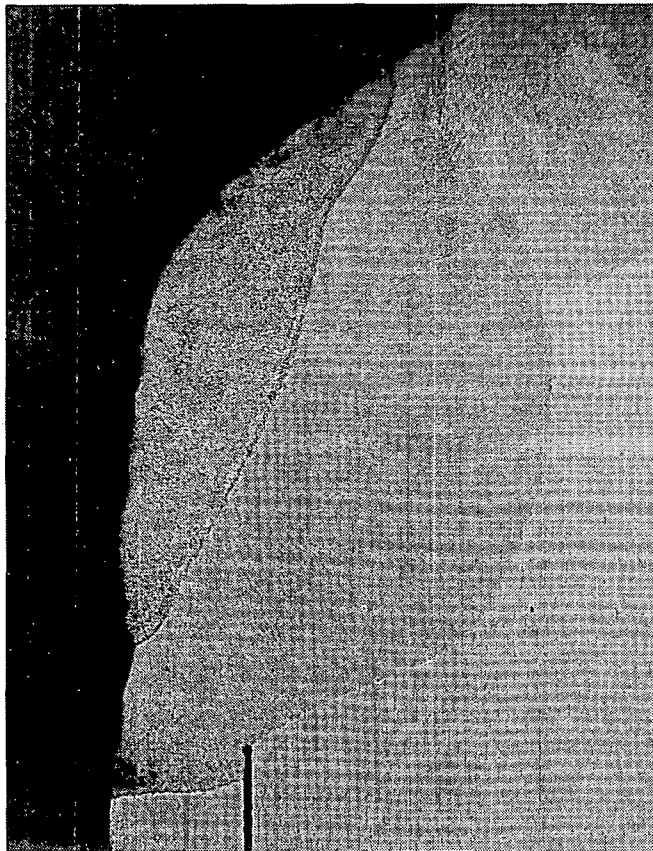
Source M-259; stainless steel outer container; top weld (24.8X).
